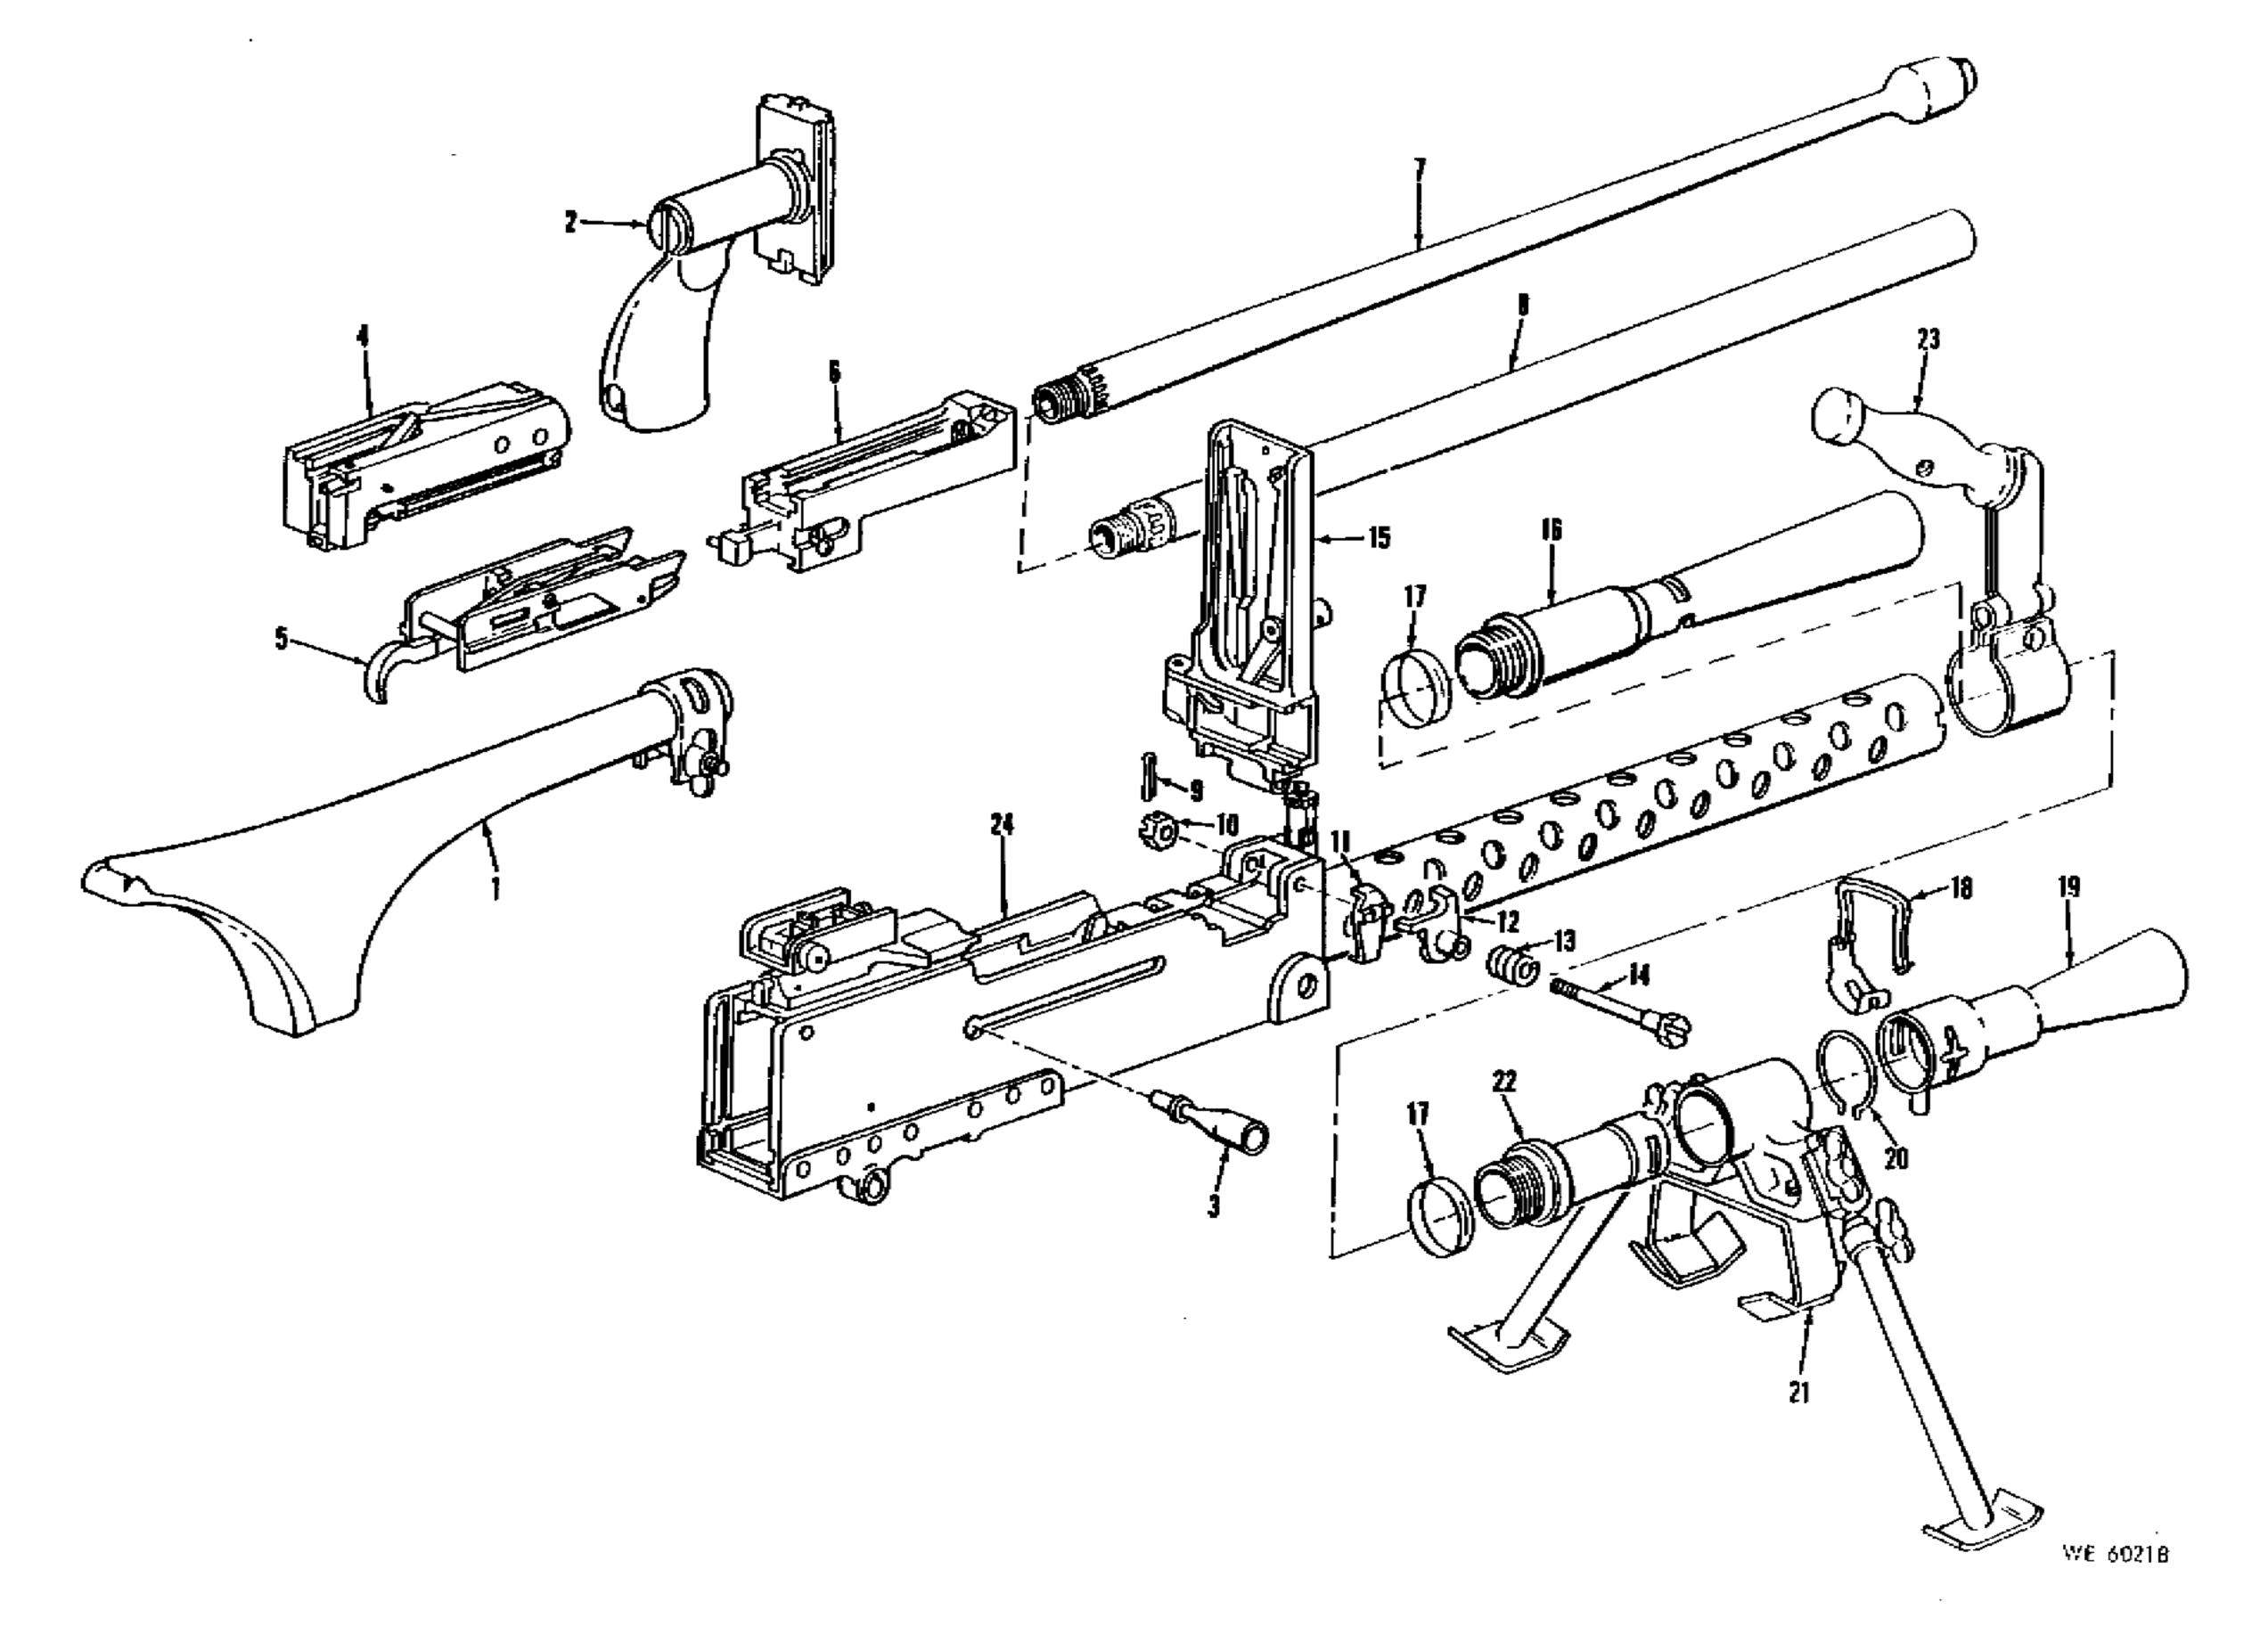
Caliber .30 Machine Guns, M1919A4 and M1919A6—major groups and assemblies—partial exploded view.
